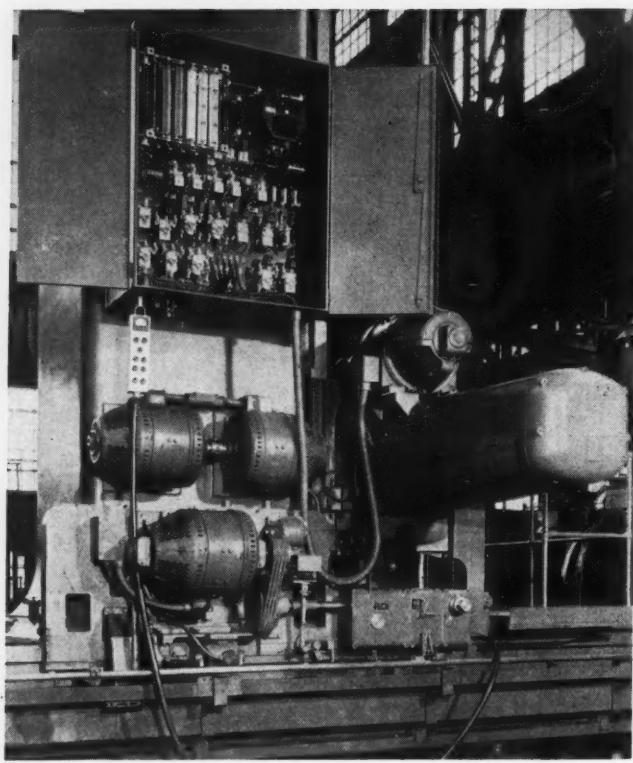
Sellen Horizontal Boring Machine Equipped with Adjustable Voltage Feed and Traverse Drive Giving 25-to-1 Speed Range and 10-to-1 Overall Range. Feed Motor D.C., 100 H.P., 450/1,800 R.P.M., 230 Volts. Spindle Motor D.C., 25 H.P., 1,750 R.P.M., 230 Volts. Includes Portable Push Button Station for Complete Control of Machine and Motor-Operated Field Rheostat for Generator and Feed-Motor Fields
